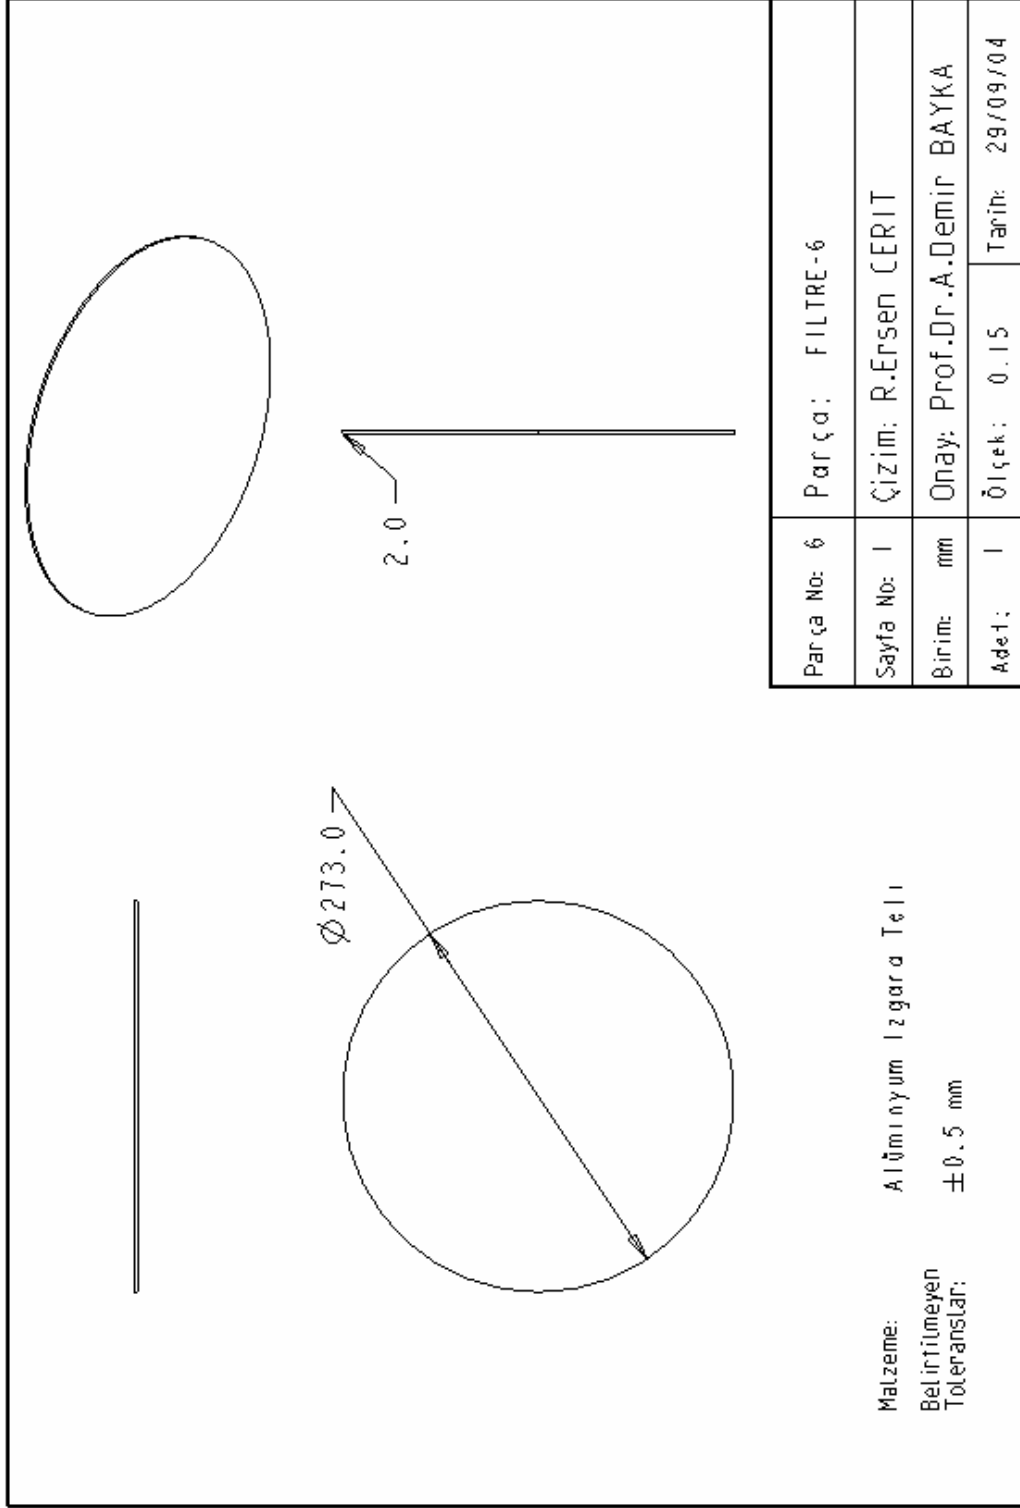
Technical Drawing of Aluminum Wire Cover.
